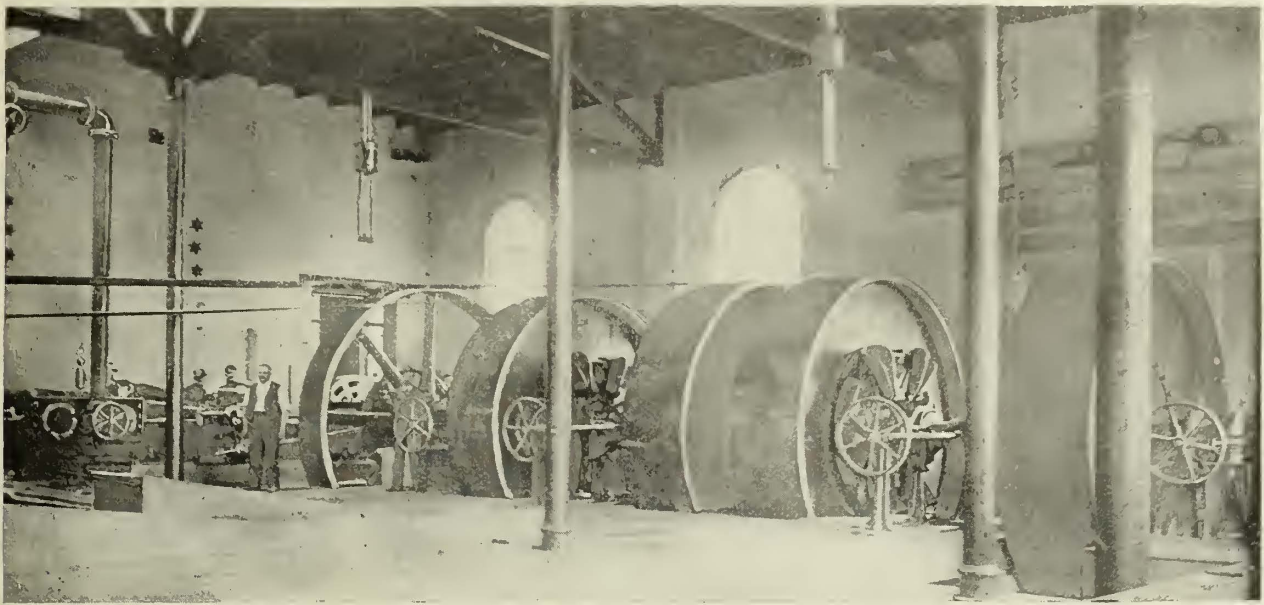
DRIVING SHAFT AND CLUTCH PULLEYS INSTALLED BY FALLS RIVET & MACHINE CO.—COLUMBUS POWER STATION.
